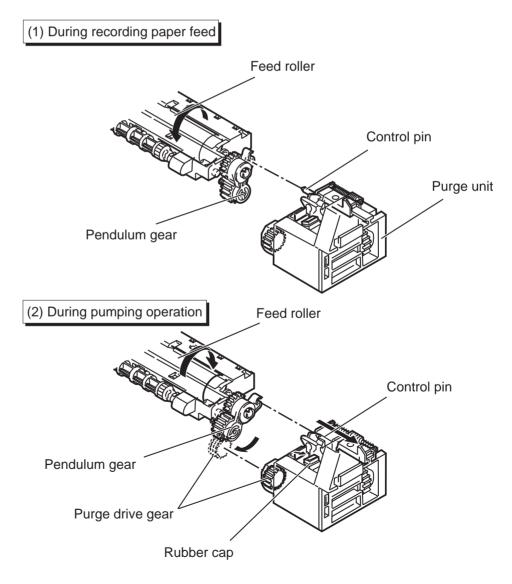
Paper Feed Motor Drive Switching Mechanism
